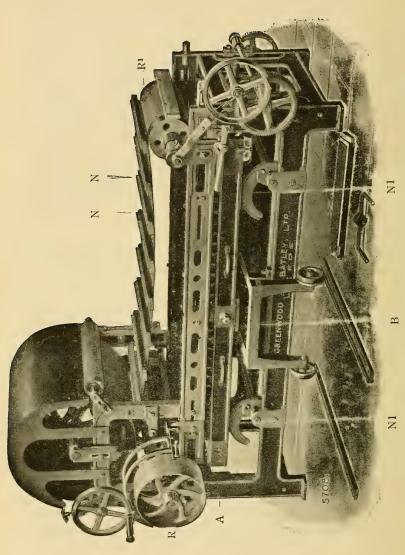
FLAT DRESSING FRAME, WITH SELF-ACTING STRIPPING DRUM.
